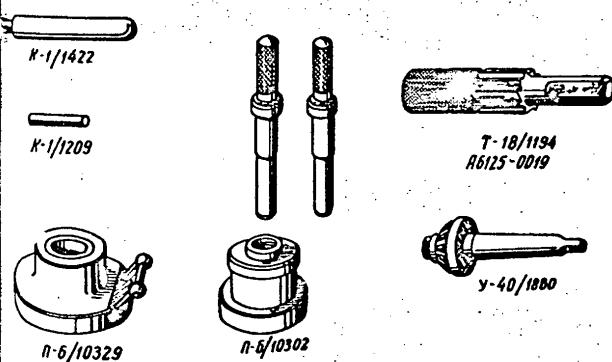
TOOLS AND DEVICES FOR REPLACING BUSHING OF SUPERCHARGER DIFFUSER DRIVE DOUBLE-ROW GEAR
